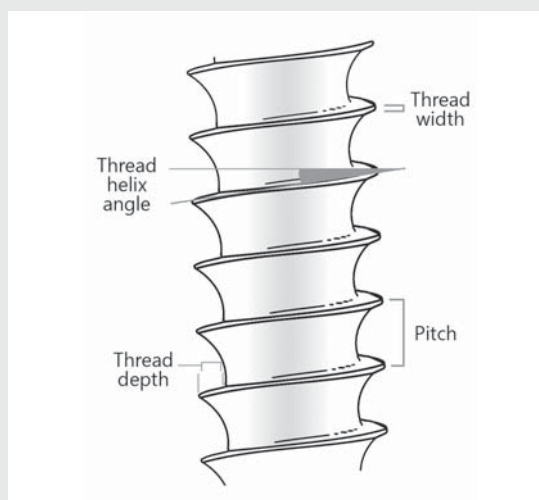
Schematic drawing of the implant macro-thread design: thread helix angle, thread pitch, thread depth and thread width.
